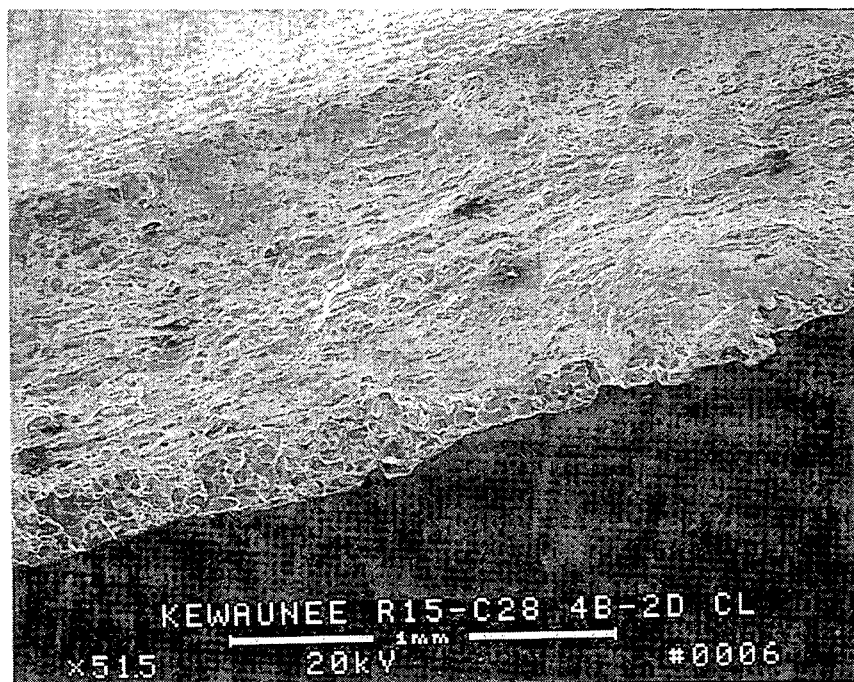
TSP1 crevice region Specimen 4B-2D of Tube R15C28. Area 6 from Figure 4-2 showing the right end of field corrosion cracking on the burst test fracture.
